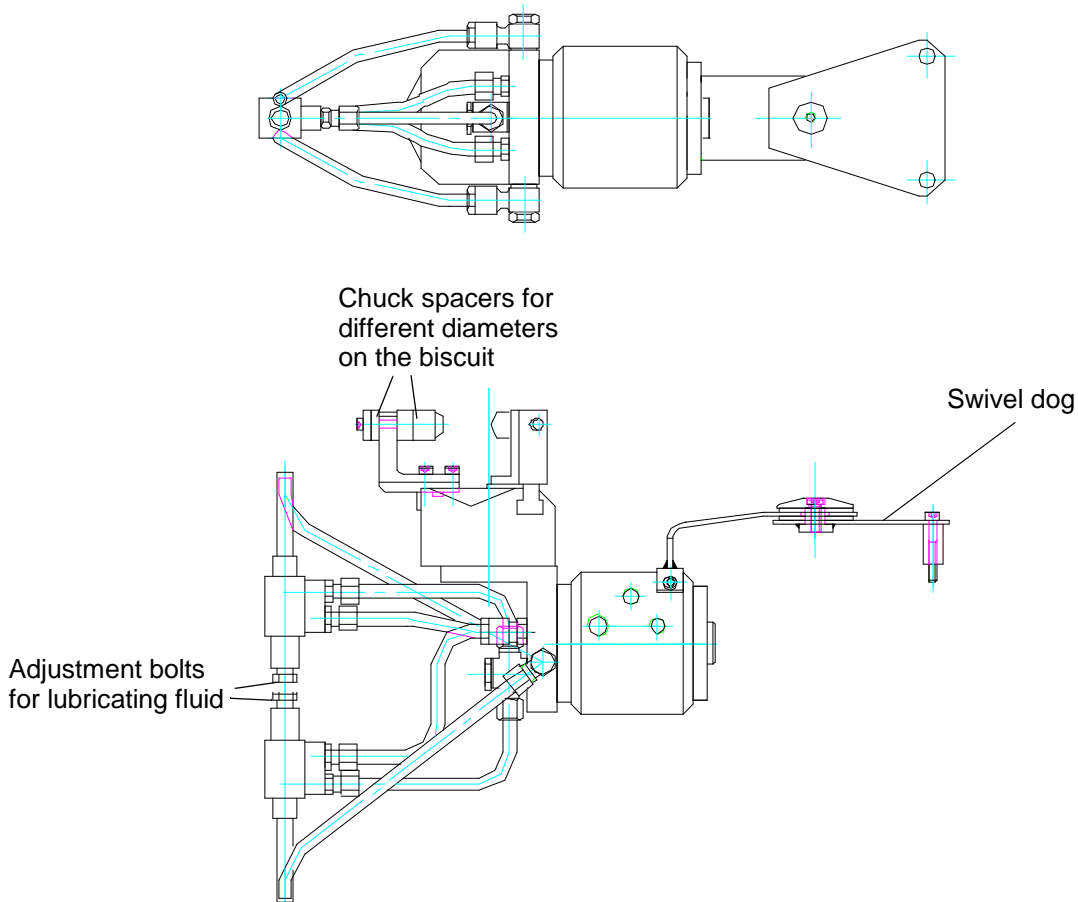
Gripper with spraying nozzles, cleaning pipes and swivel dog.
